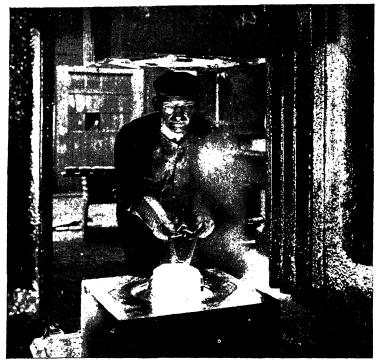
Placing hot stock preparatory to drop forging. The upper half of the die is just visible in the upper part of the picture. (Bethlehem Steel Co.)
